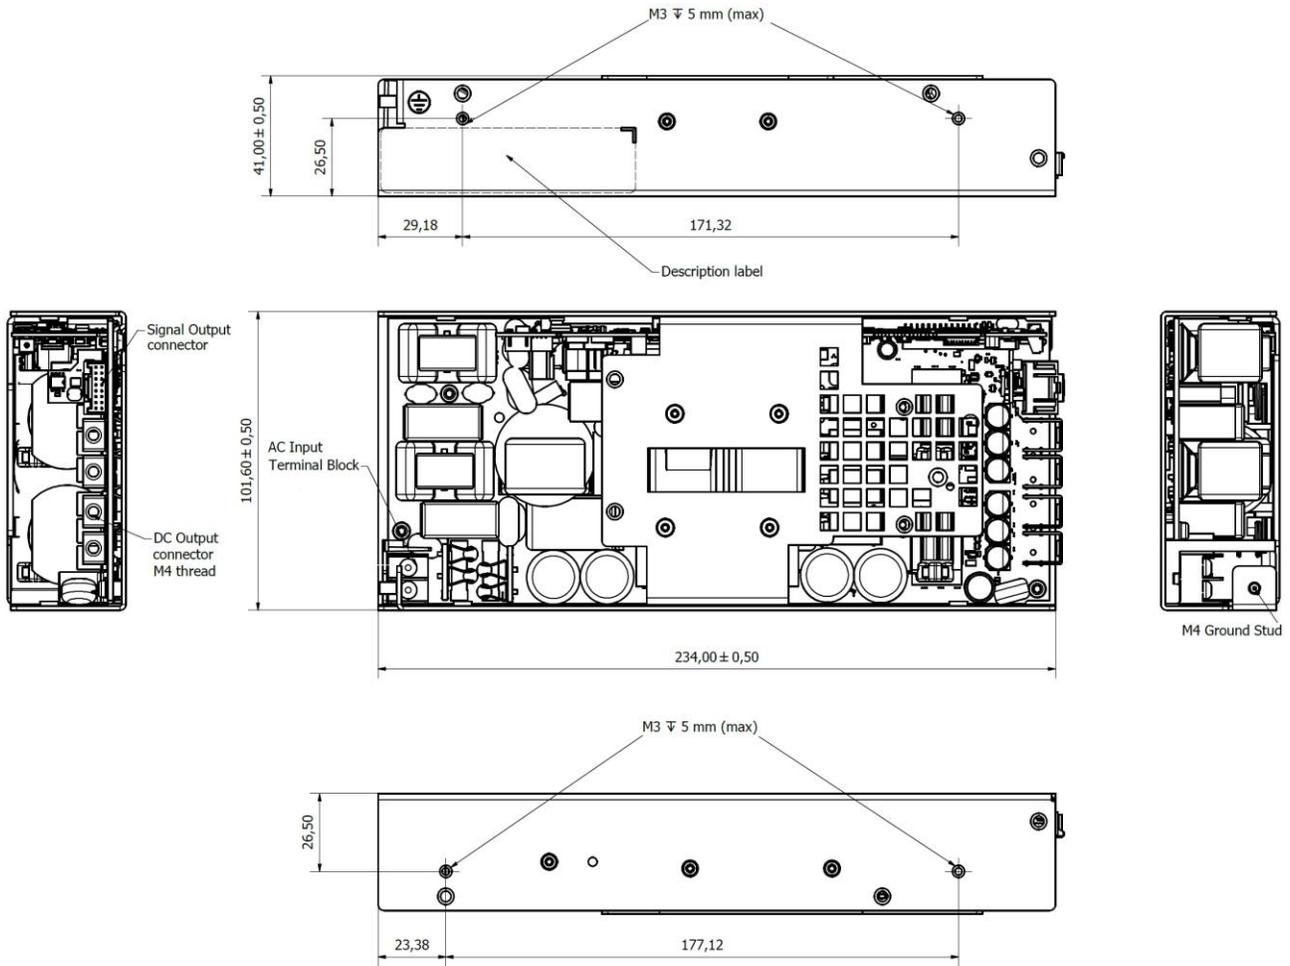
Mechanical Drawing - MBC1200-1T24-UCF Model
